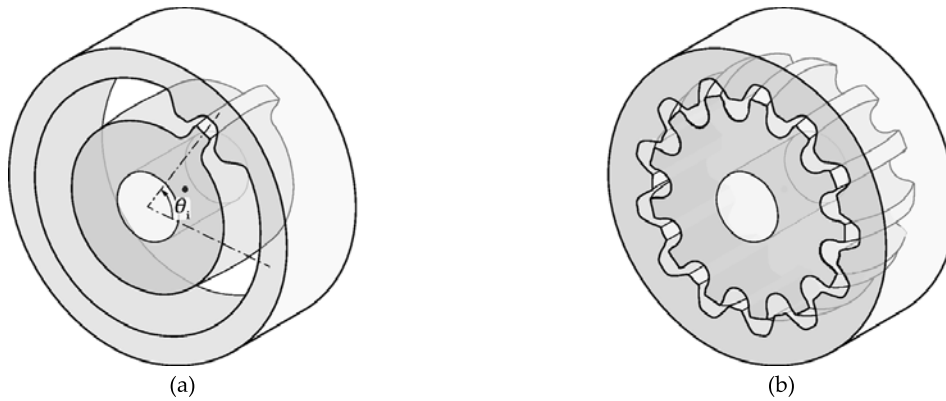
Types of FE model analysis: (a) single toothed gear coupling, and (b) complete gear coupling.
